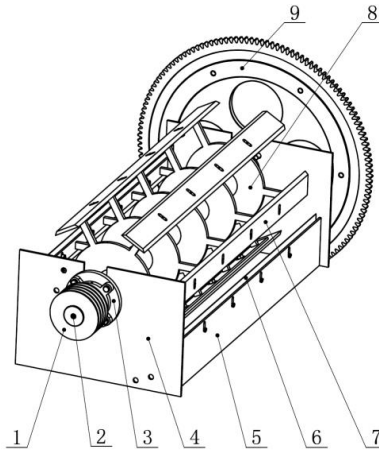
Structural sketch of cutting mechanism. 1: Straw cutting shaft belt pulley; 2: Straw cutting shaft; 3: Bearing block; 4: Body frame; 5: Fixed knife bracket; 6: Fixed knife blade; 7: Moving knife blade; 8: Moving knife bracket; 9: Cutting shaft gear
